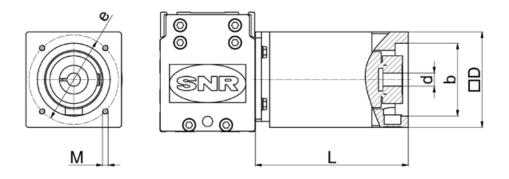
Dimensions AXC with plug-in planetary gearbox version ZS.
